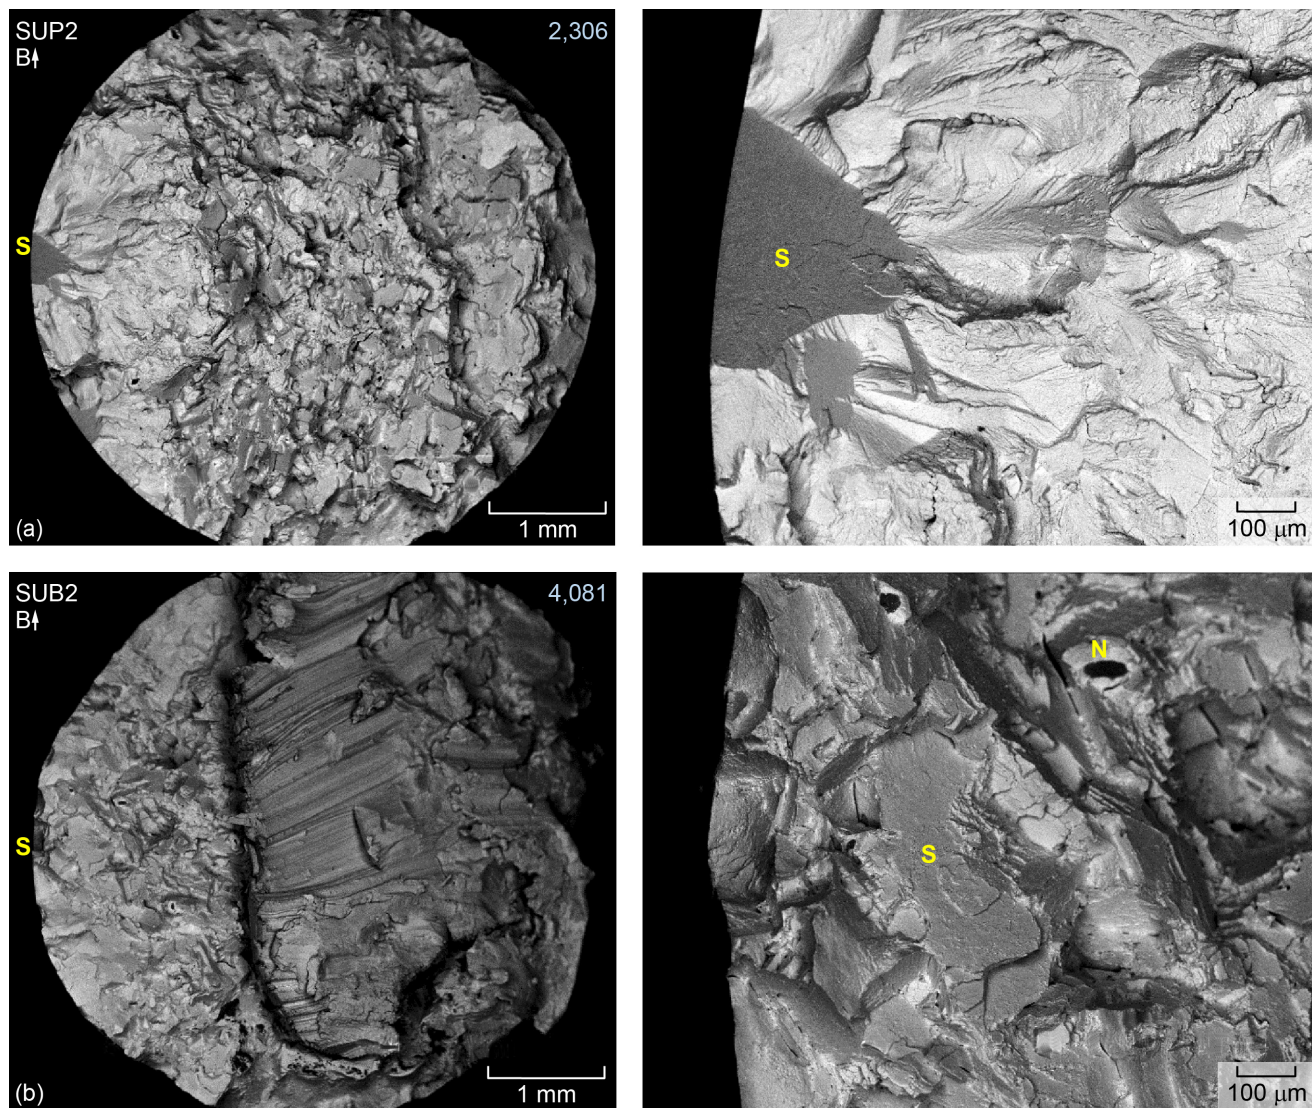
Fatigue fractures at 760 °C observed for specimens loaded parallel to building direction, tested at maximum and minimum stresses near 841 and –427 MPa. Fatigue life and failure initiations at grain slip failure (S) or nonmetallic inclusions (N) are indicated for each specimen. (a) SUP2. (b) SUB2.
